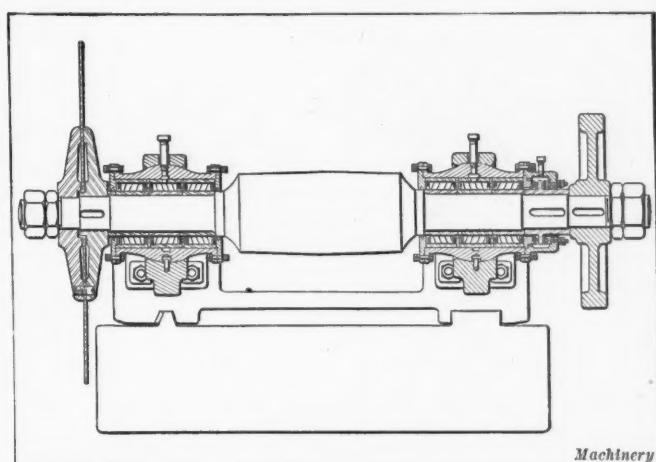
Application of Hyatt Roller Bearings for carrying the Spindle of a Hot Saw
